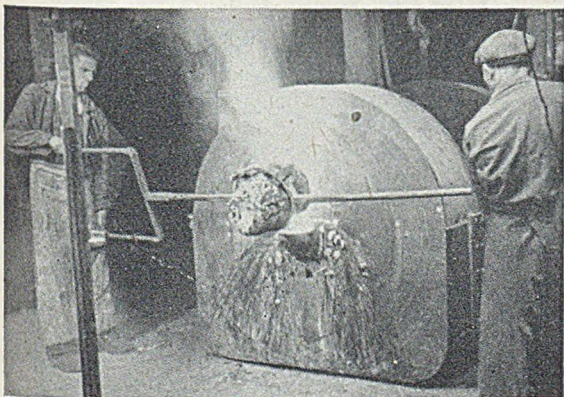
Pouring the Molten Alloy into a Split-ring Mould Casting Machine.
